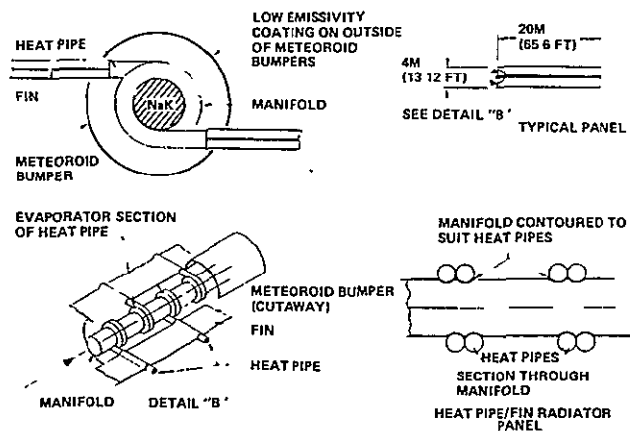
Heat Pipe/Fin Radiator Panel Concept
